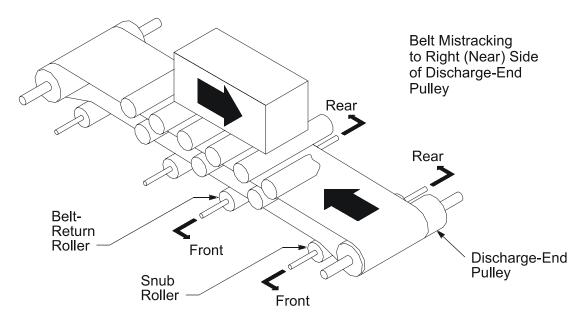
Tracking Belt at Discharge End of Conveyor
